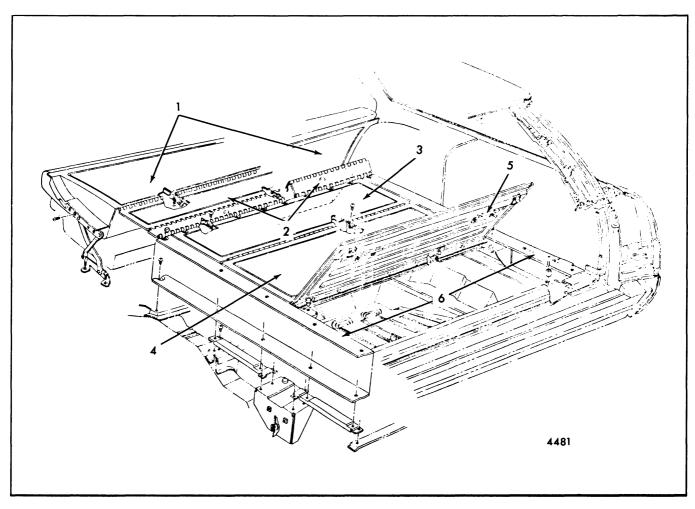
Folding Seats and Load Floor Panels - "A and B" Body Two-Seat Styles
